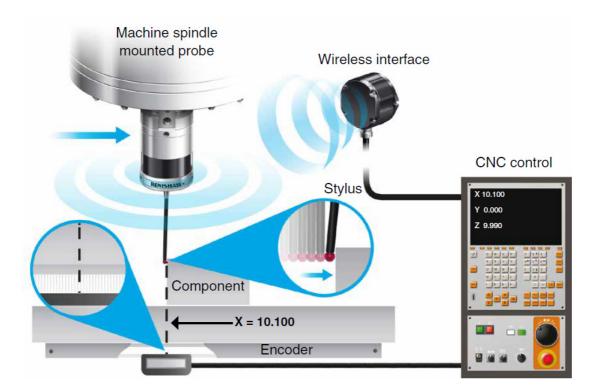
Components of a Machine mounted Radio-Transmission Touch Probe Source: Renishaw – Technical Specifications, p.10
